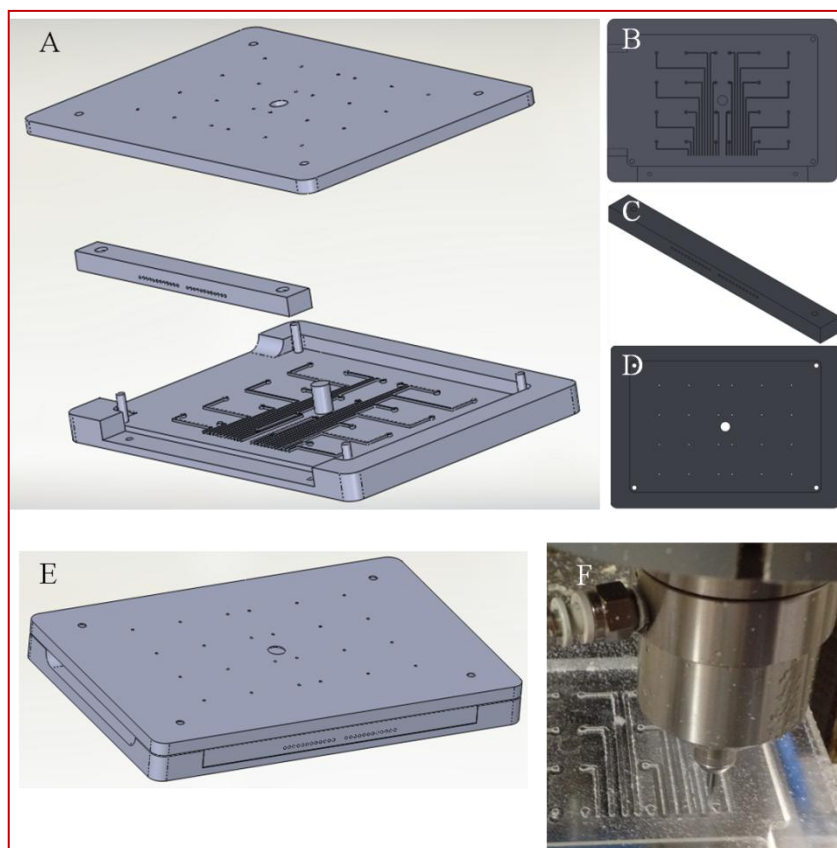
Modular mold for PDMS casting. Exploded view of the modular mold (A). Bottom pieces with thin features (B). Side part with 1 mm holes (n=24) (C). Cover piece that seals the mold (D). Assembled isometric view of the mold (E). Cutting process of the piece by the CNC milling machine (F).
